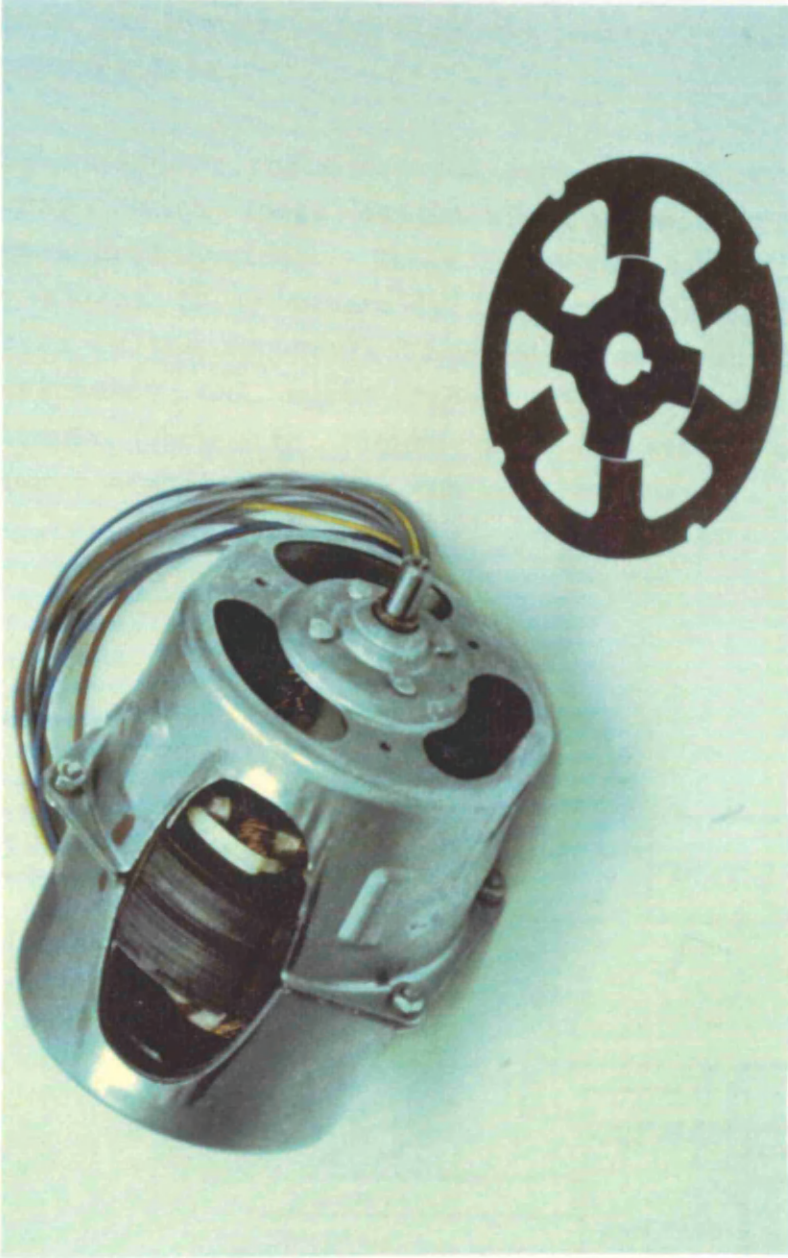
Stator Casing for 88mm Stator diameter motor
